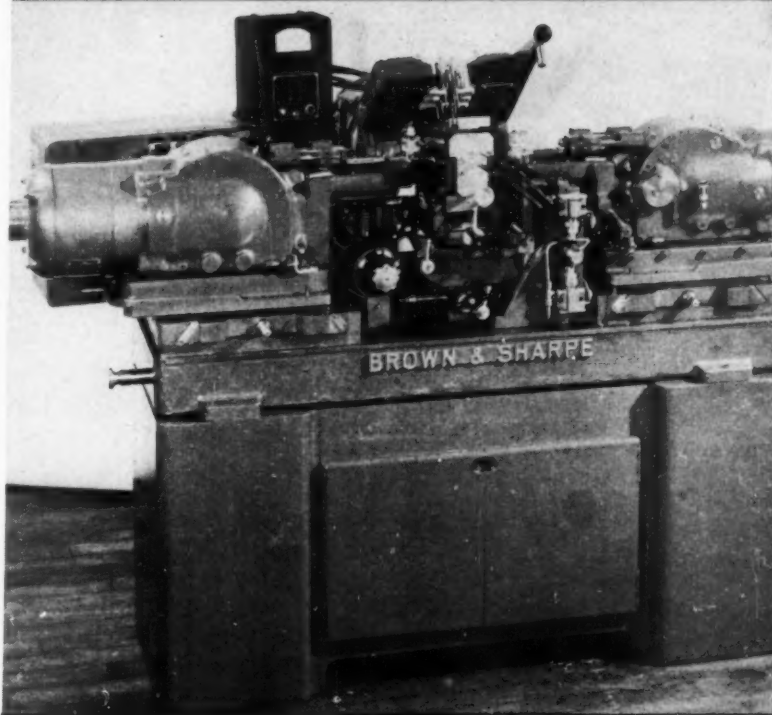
Jet blade positioning and center drilling machine accurately locates three center holes for subsequent machining operations
